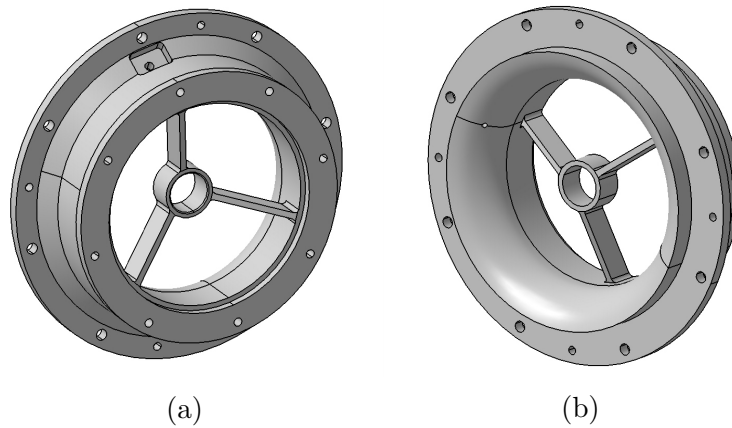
Geometry of Shroud block of the CRCC configuration of the test bench: (a) face view and (b) rear view
